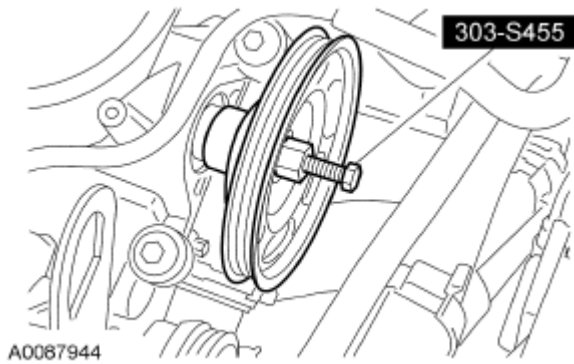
Installing Coolant Pump Pulley Using Special Tool (303-S455)
